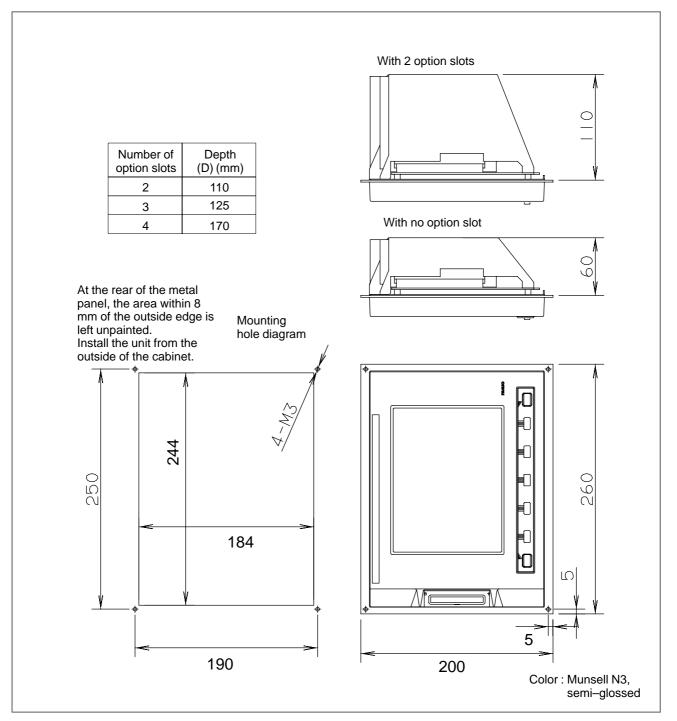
External dimensions of 7.2" LCD–mounted type CNC control unit
